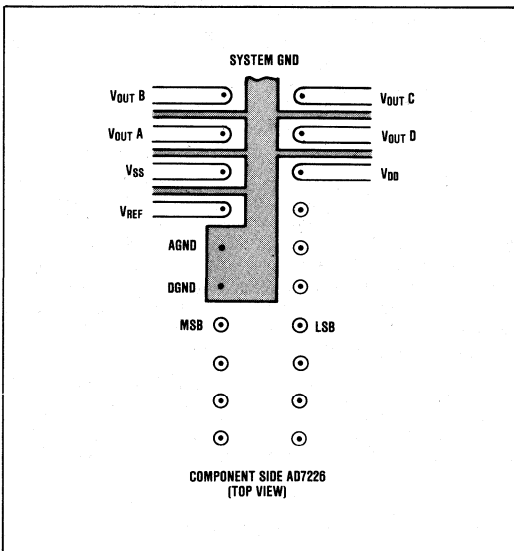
Suggested AD7226 PCB Layout for Minimizing Crosstalk
